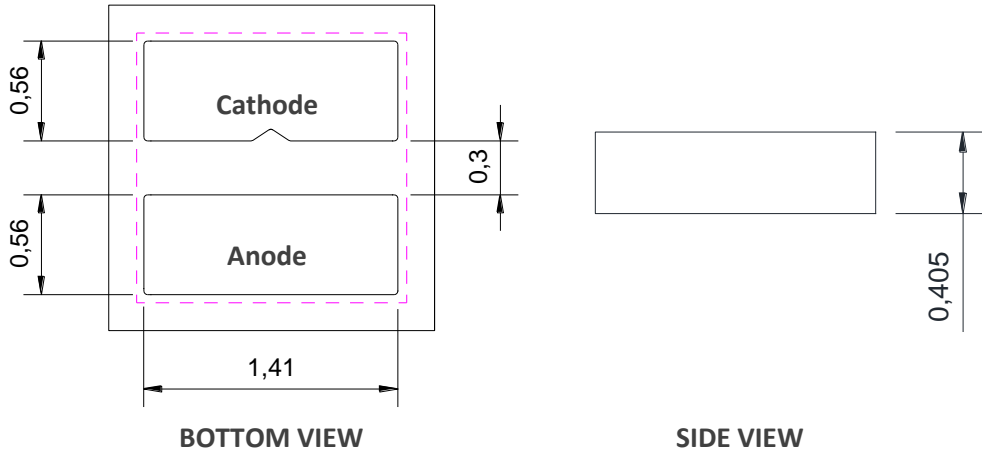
WICOP Z8Y19 Solder Pad Dimensions.
